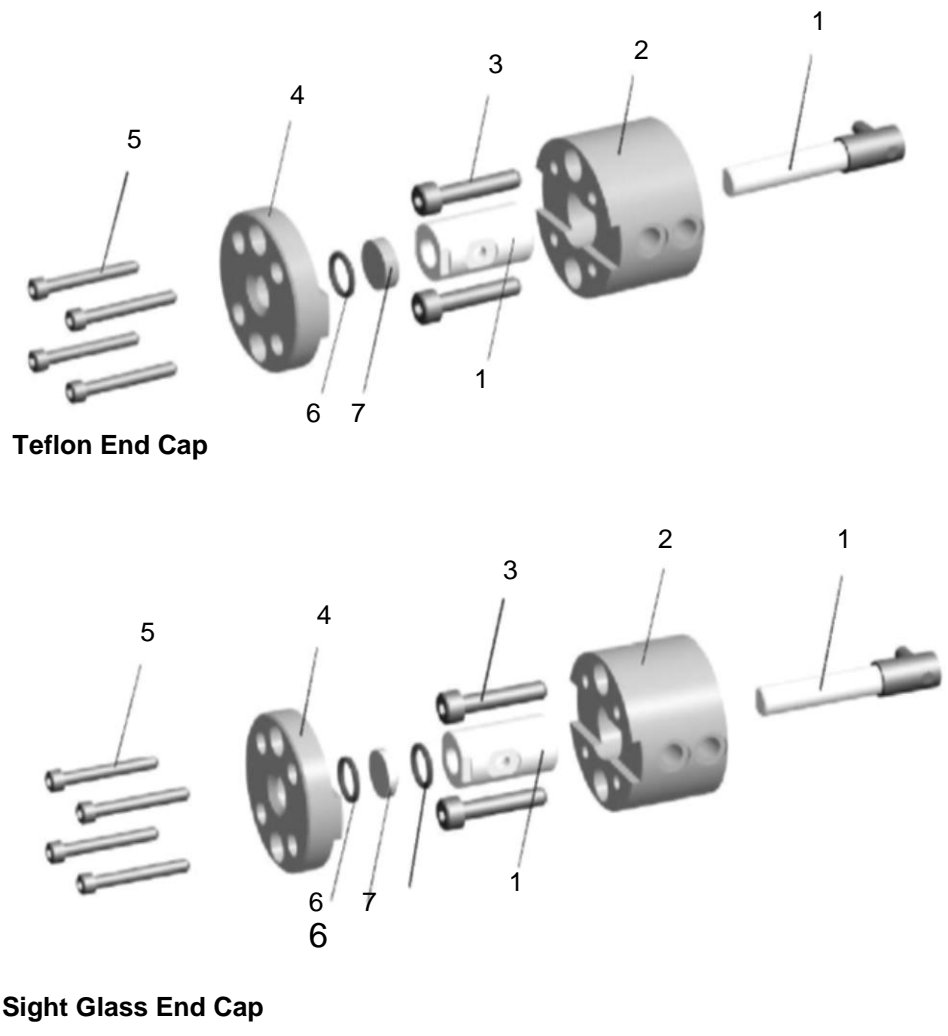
Micro SL Pump Module (Sheet 1 of 3)
